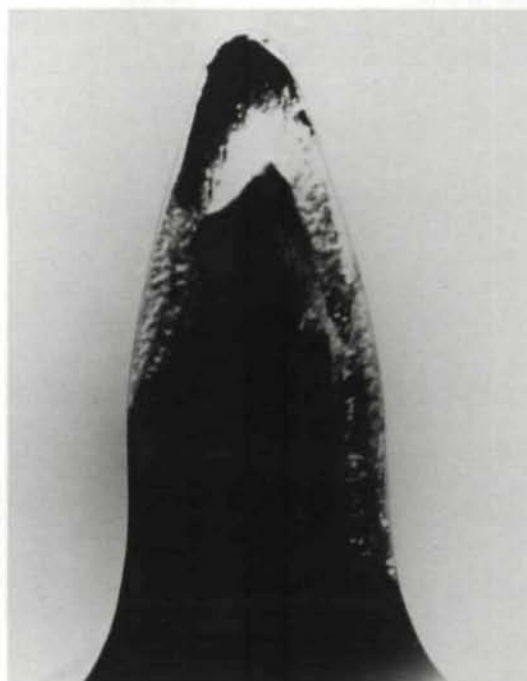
Excessive cratering on DP shaper before sharpening cutter tooth due to shaping too many parts.
